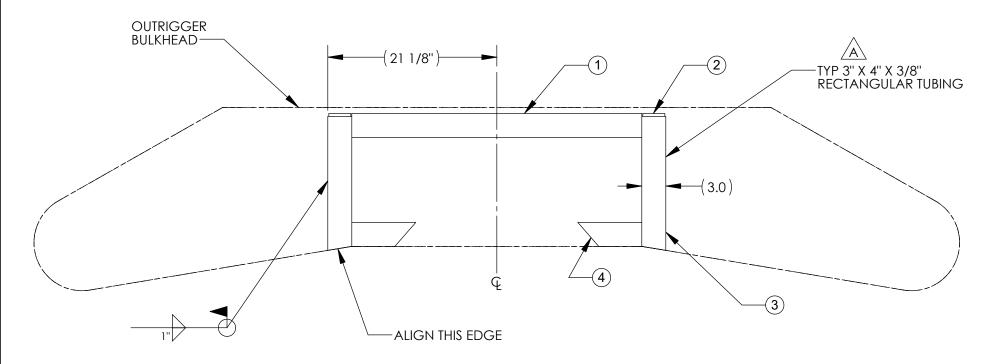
B Bulkhead Mounted RW-1650GX Parts
